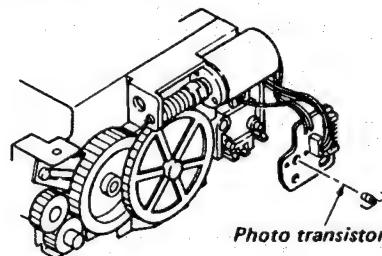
Replacement photo transistor on FL P.C. board (R)
